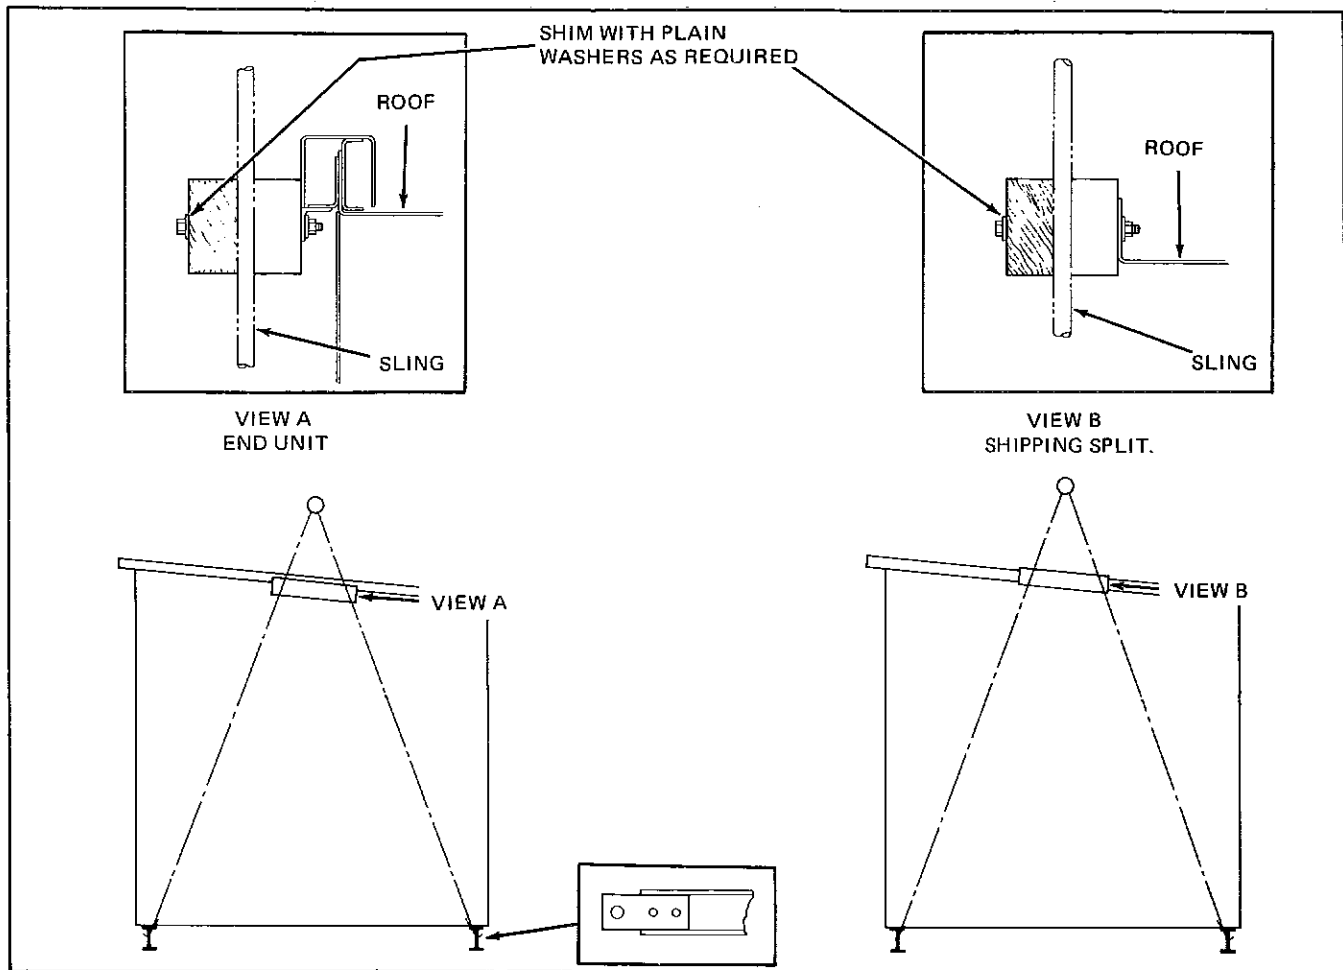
Lifting 15 kV Conventional Outdoor Switchgear
